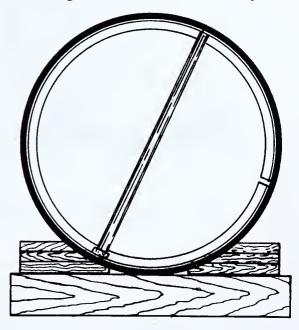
Ring Held in Position for Tack Welding
